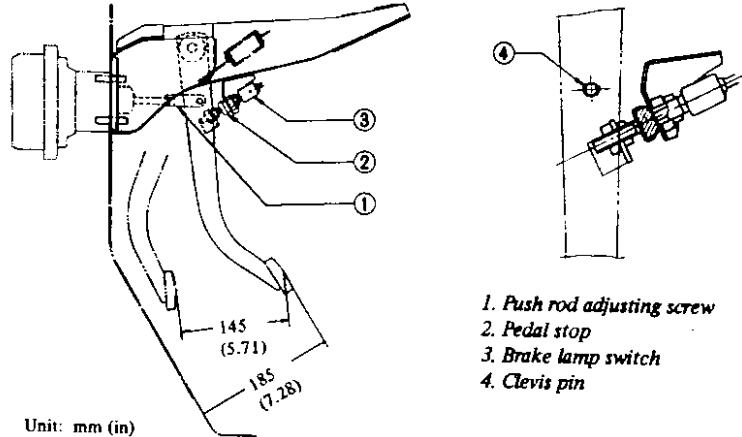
Brake pedal adjustment - 1800 c.c. models
